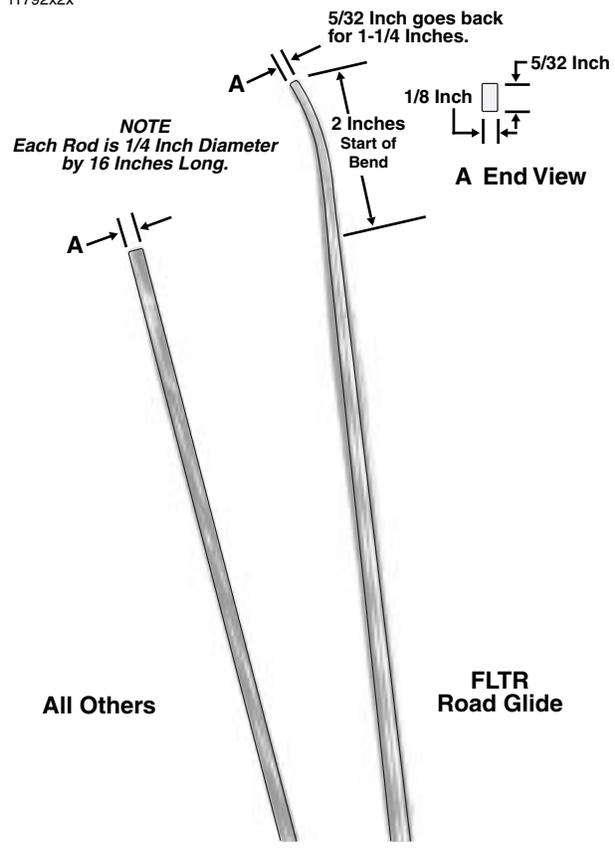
Fashion Steering Head Bearing Adjustment Tool From Drill Rod
